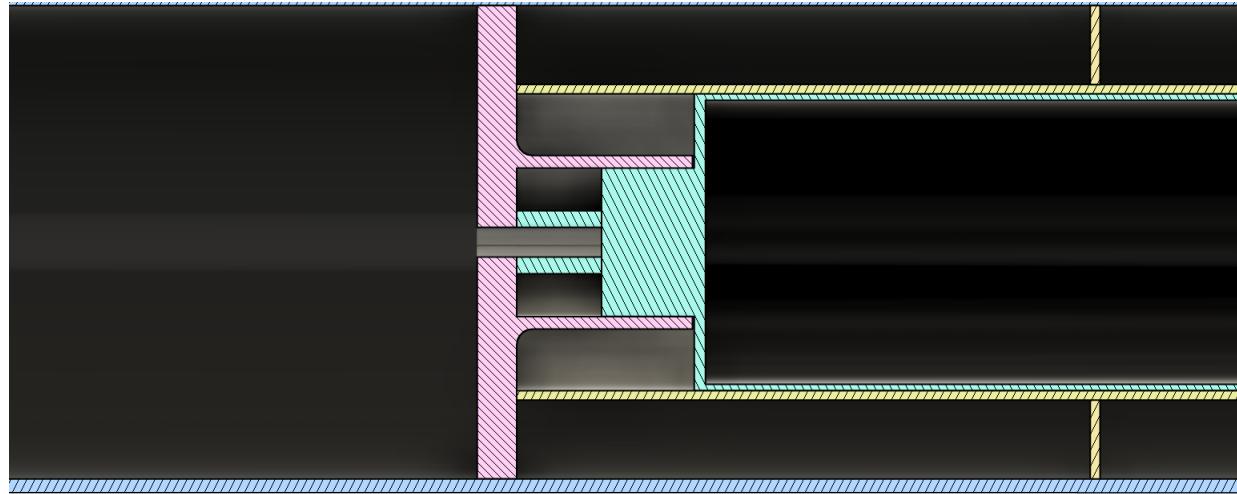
Motor Bulkhead (Pink) and Motor Forward Closure (Blue)
